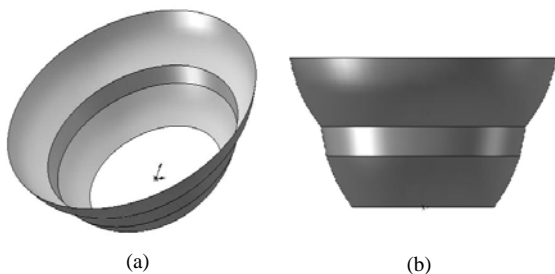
CAD model of the component used to illustrate adaptive slicing (a) Isometric view (b) Profile view
